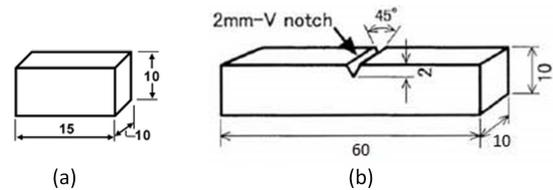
Samples of the machined (a) hardness and (b) impact test specimens.
